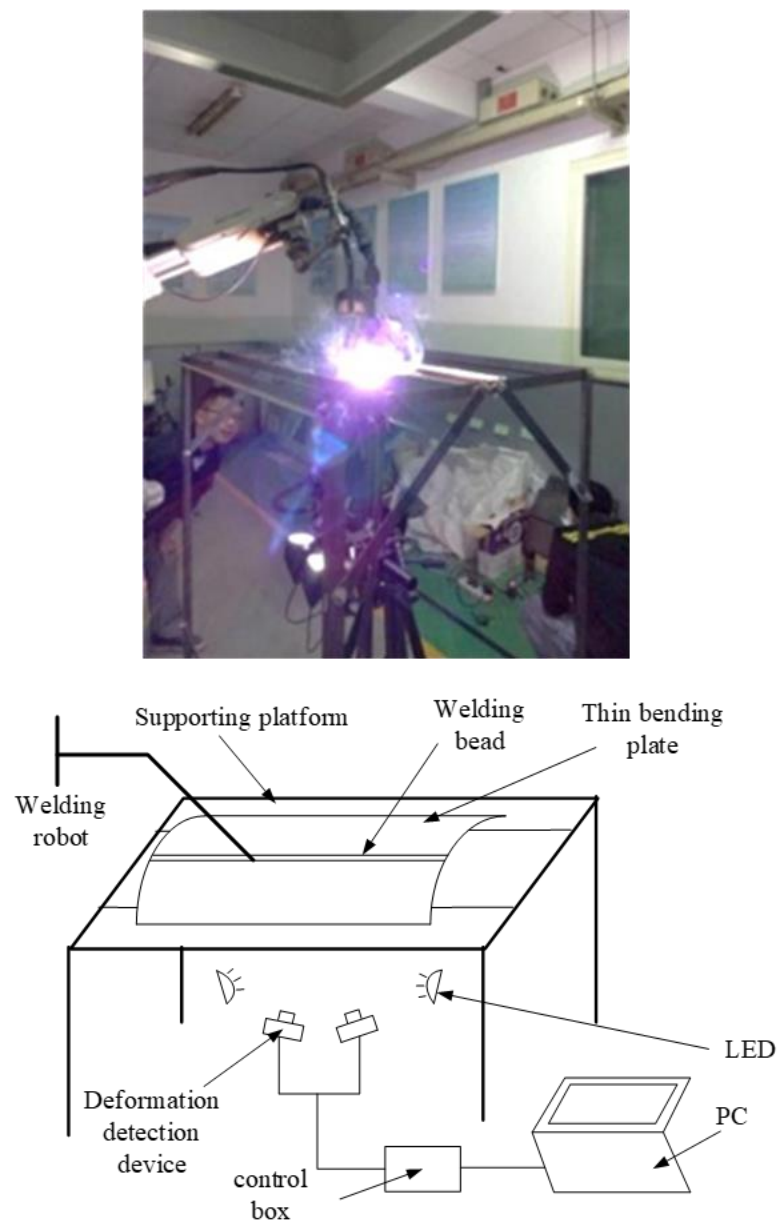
Welding test equipment experimental bench and schematic diagram.
